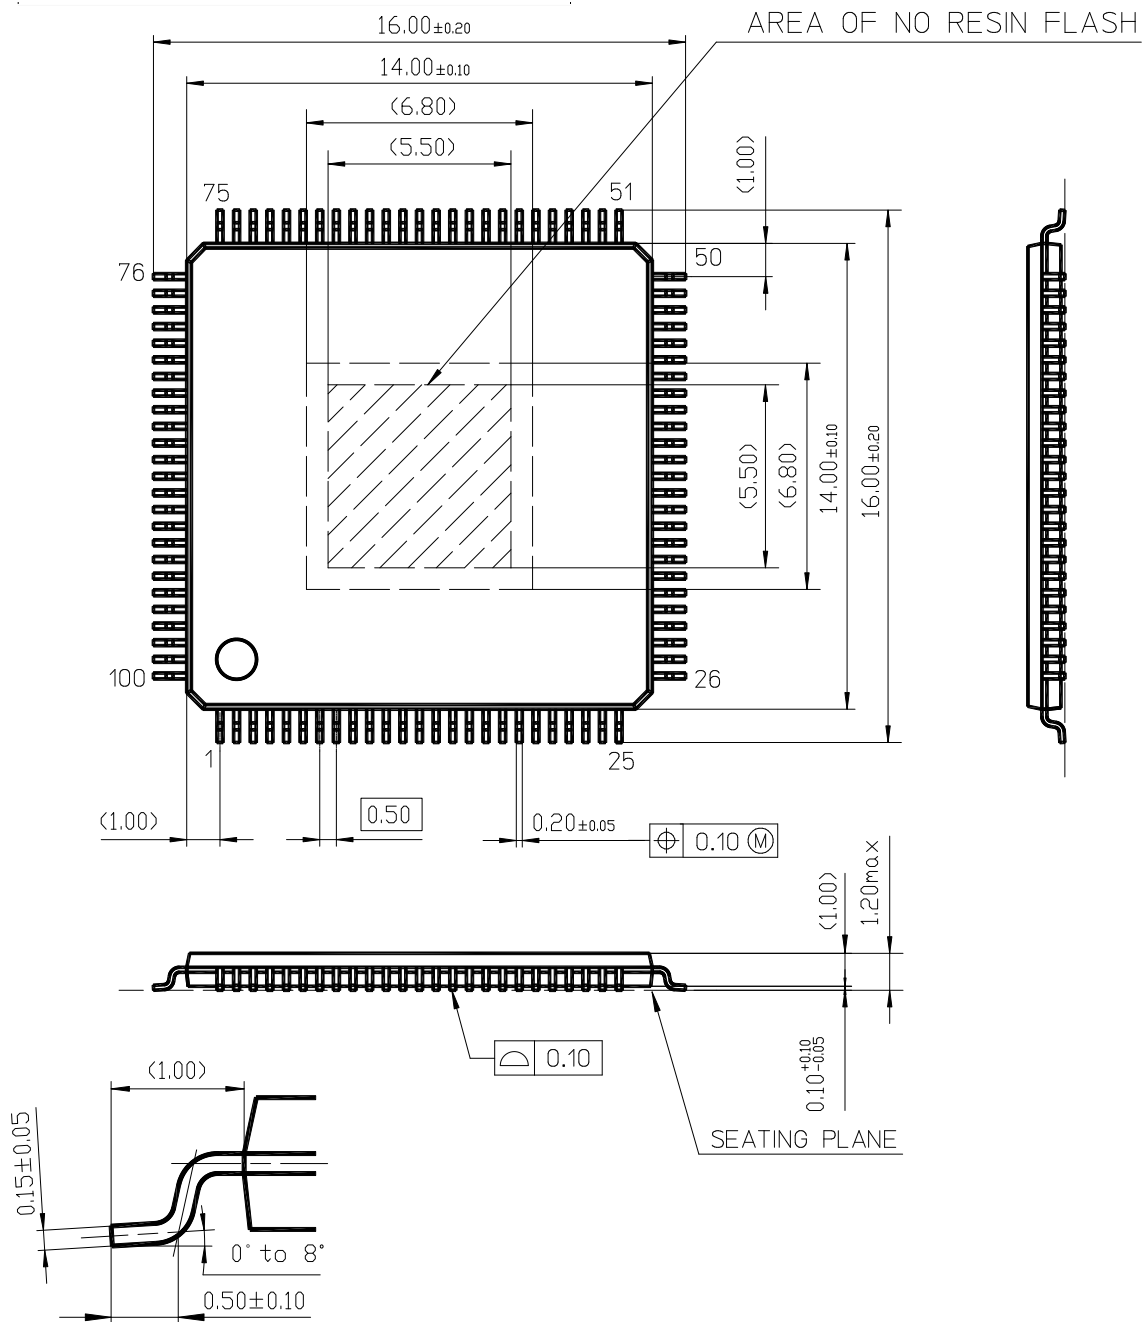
Package Dimension of HQFP100-14 □ (unit: mm)
